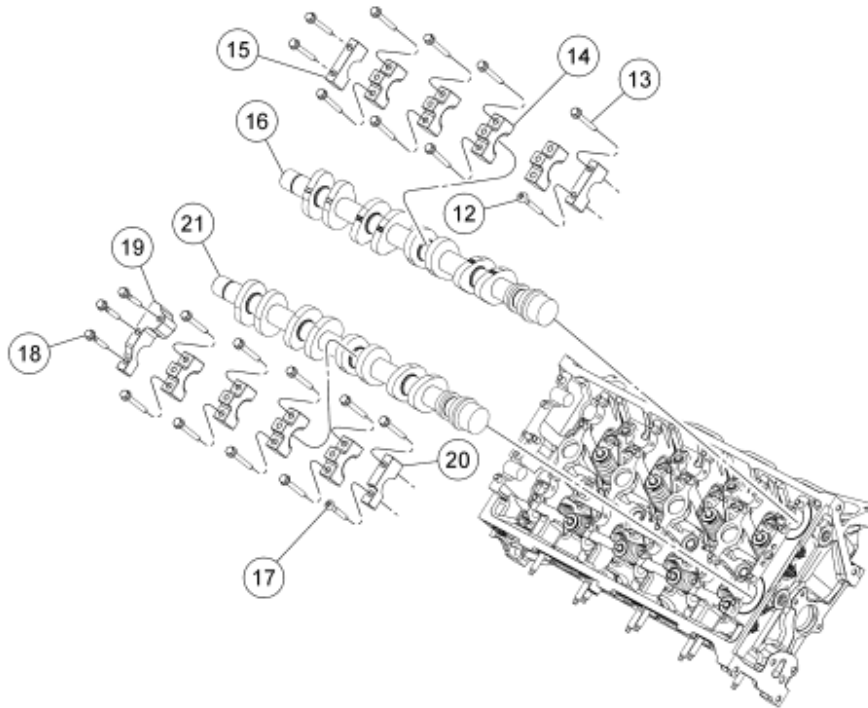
Exploded View Of Cylinder Head With Torque Specification (1 Of 3)
